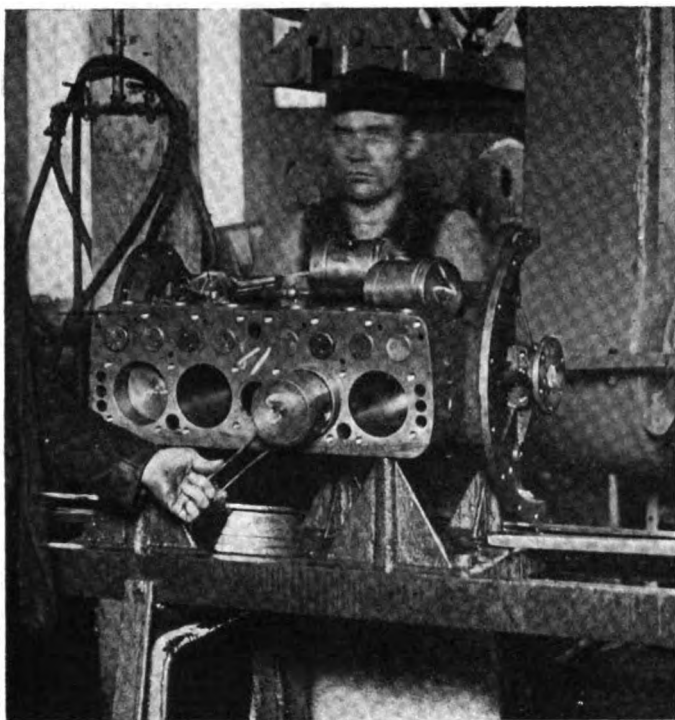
Note operators on both sides of track, one man slipping piston in and the other putting connecting-rod bearing caps in place
